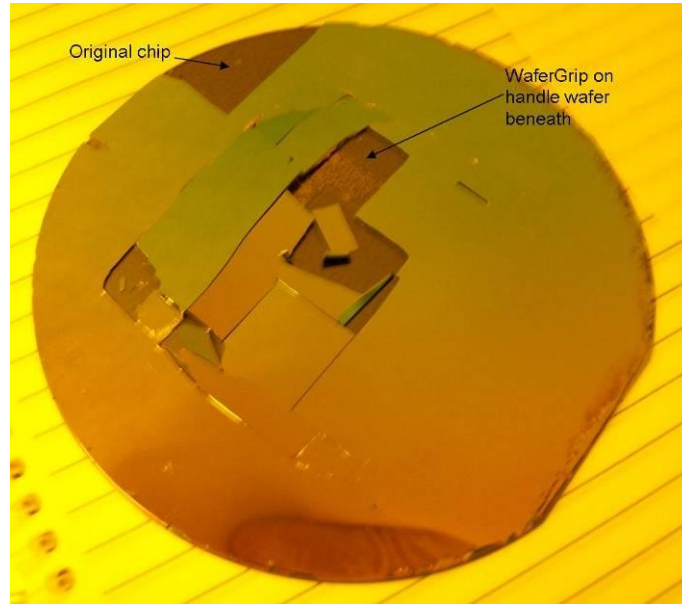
Wafer which burst due to cracks formed during mechanical wafer separation causing the wafer to shatter when under vacuum in the vapor prime oven.
